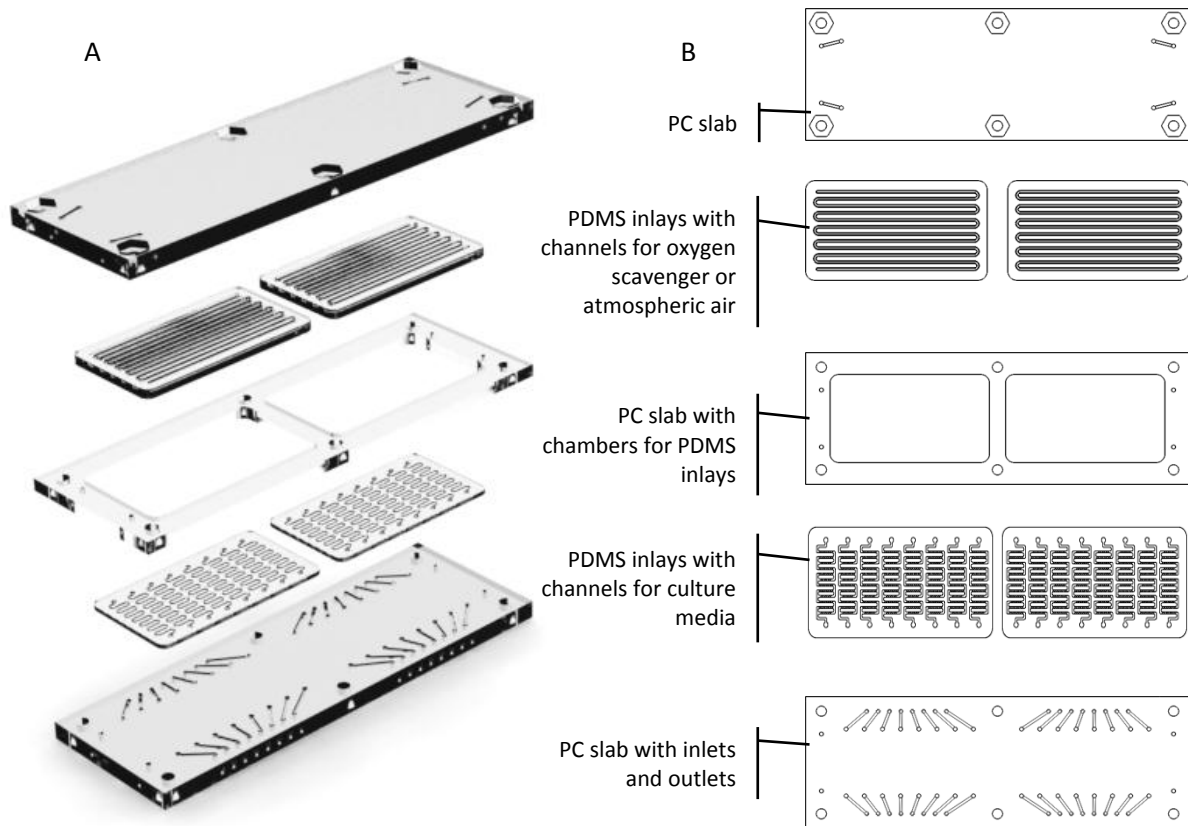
Scheme of the gas exchange module: (A) exploded view of the module, (B) top view for on the module layers.
